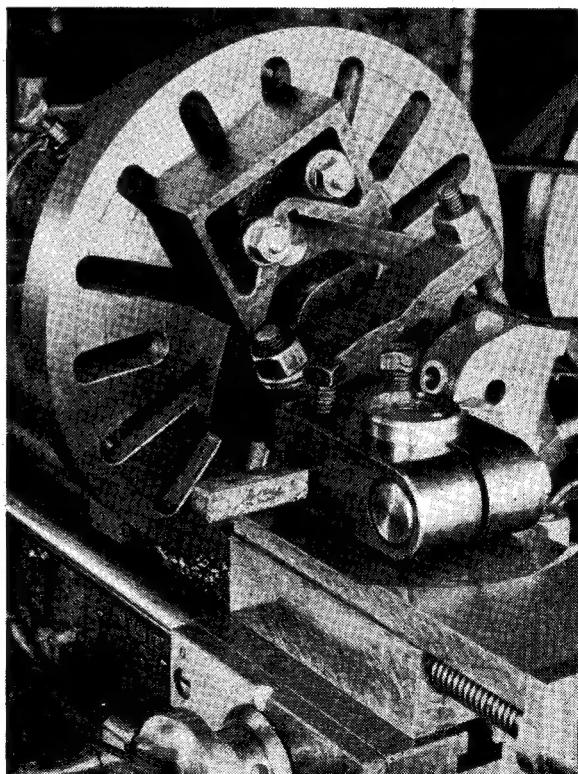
Machining the bracket casting mounted in a Keats V-angle plate
